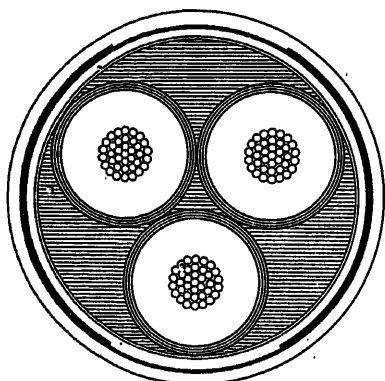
FIG. C.—“S.L.” type of 60 000-volt, three-core cable. Conductor 0.28 sq. in. (87/0-090); overall diameter 4.5 in. (Henley).
